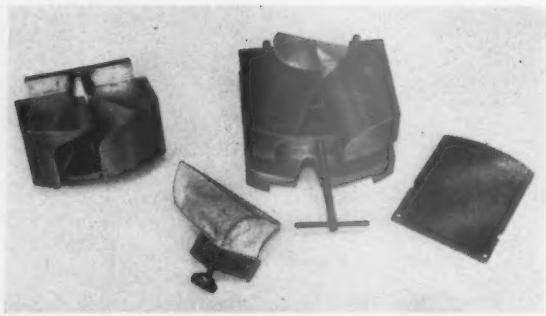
On the left is the master pattern, used on a pantograph milling machine, in the production of the semi-circular brass insert in the component shown in the centre. This component, together with its lid, on the right, forms a mould into which the stone, in front, is poured. The cavity in the semi-circular brass insert is the shape of the space between each pair of rotor blades, thus the stone is in effect a core
